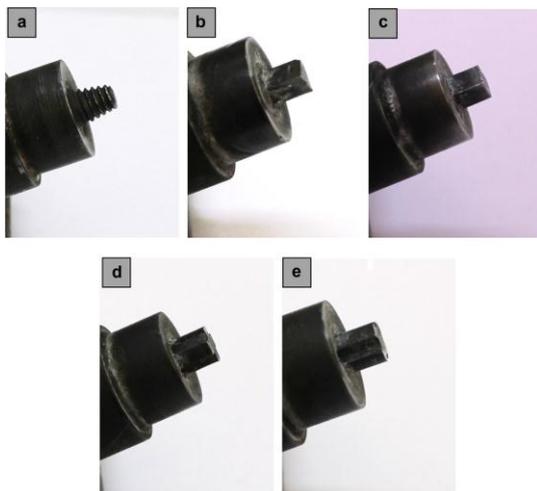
Designed pin geometries: (a) TT, (b) T, (c) S, (d) FFS, and (e) FFC pin tool.
